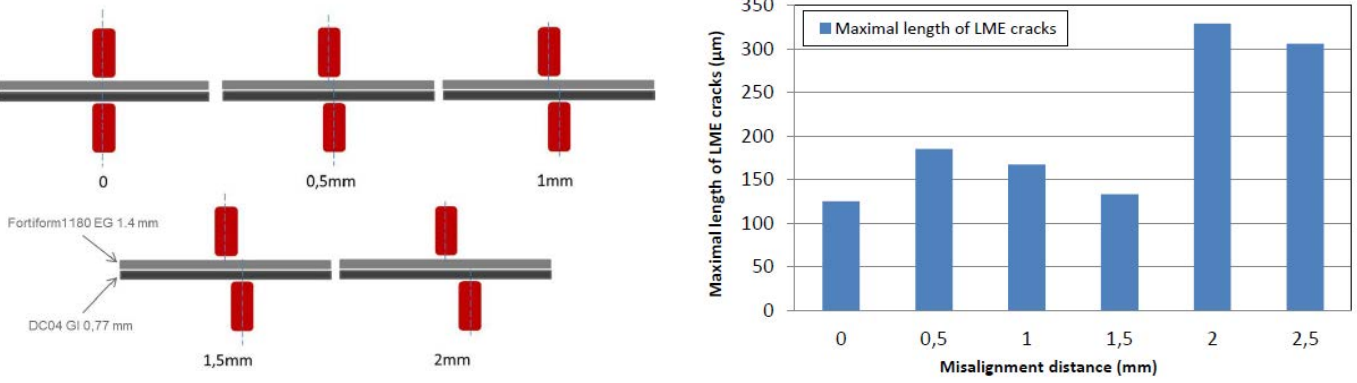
Impact of the lateral misalignment of the welding electrode on LME crack sizes occurrence.
